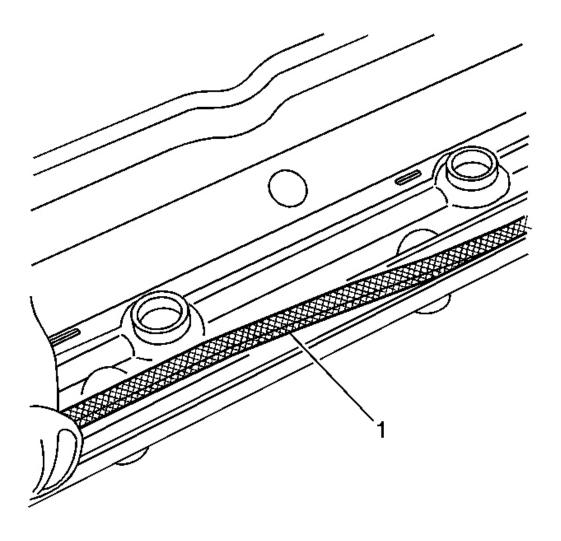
Rocker Arm Cover Gasket Courtesy of GENERAL MOTORS CORP.
